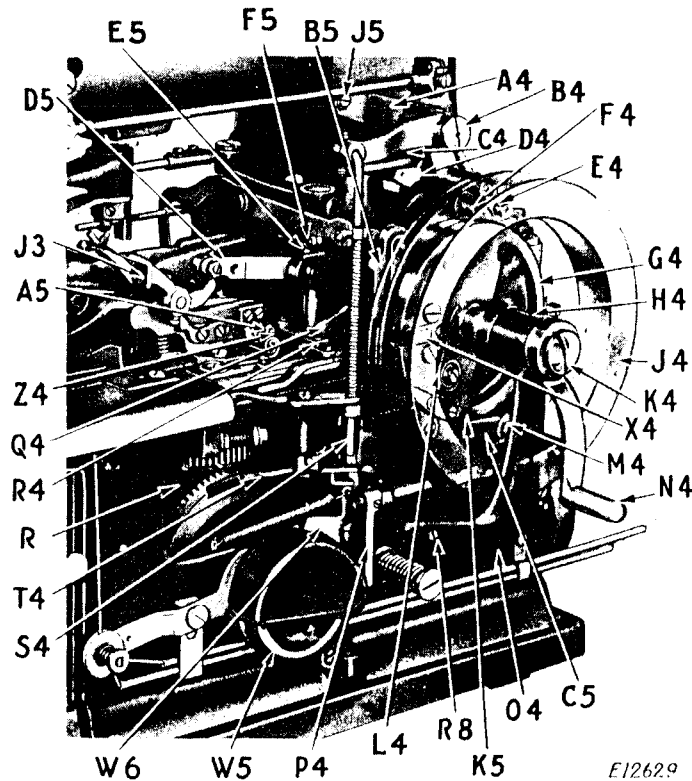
"X-Ray" View of Buttonhole Cutter Pulley Showing Buttonhole Cutter Engaging Stud and Latch
